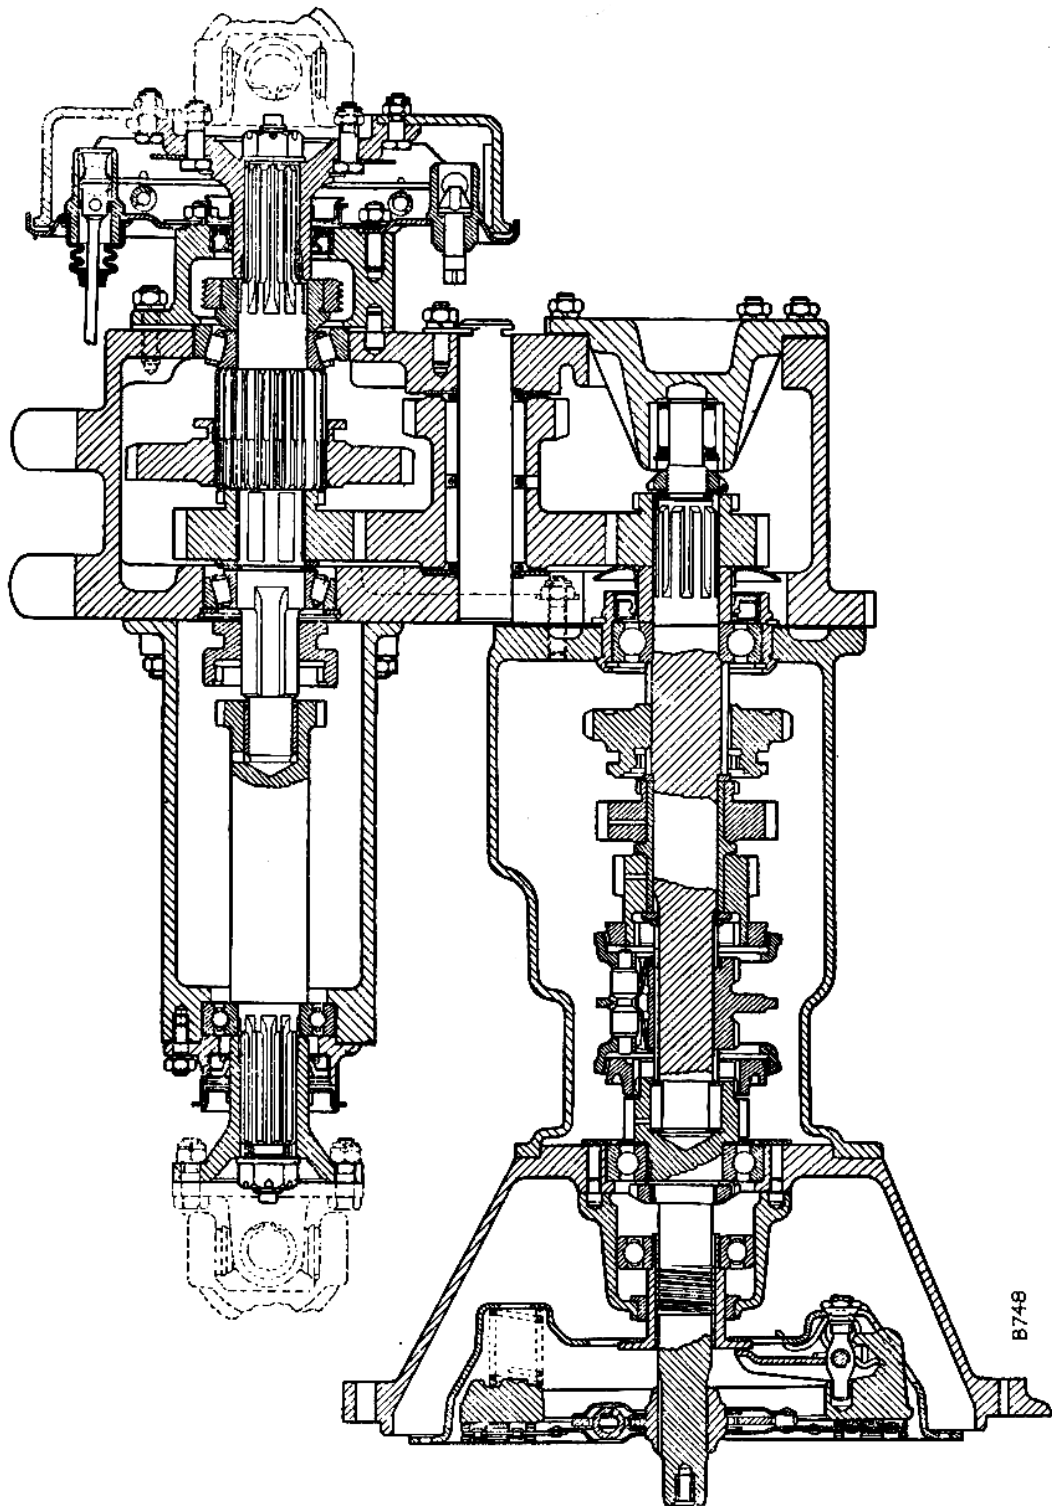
Cross-section of gearbox unit with dog clutch controlling front-wheel drive plan.
